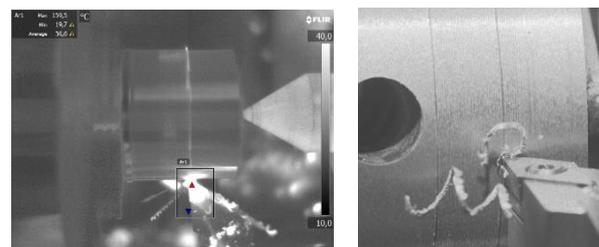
Thermal imaging camera image (a), chip forming mechanism (b) (cutting speed: 100 m/min, feedrate: 0.34 mm/rev, depth of cut: 0.5 mm)
